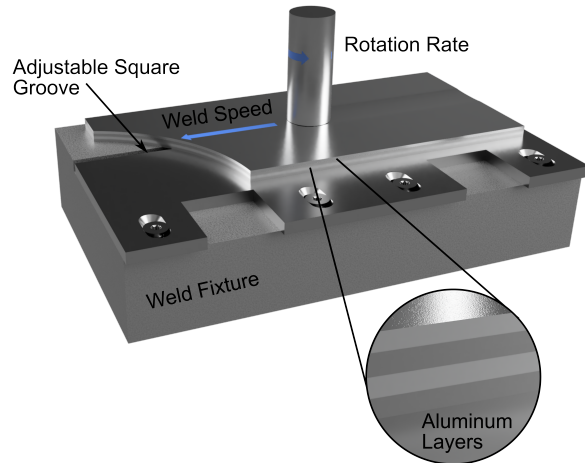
Multi-alloy layered sample welded using a fixture with a square groove.
